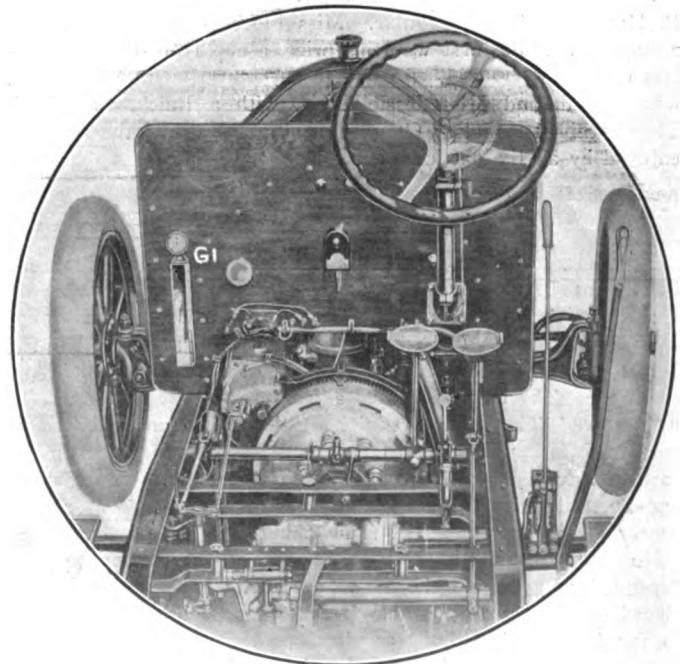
Part view of the chassis, showing the dashboard and various control parts, electric generator flywheel
